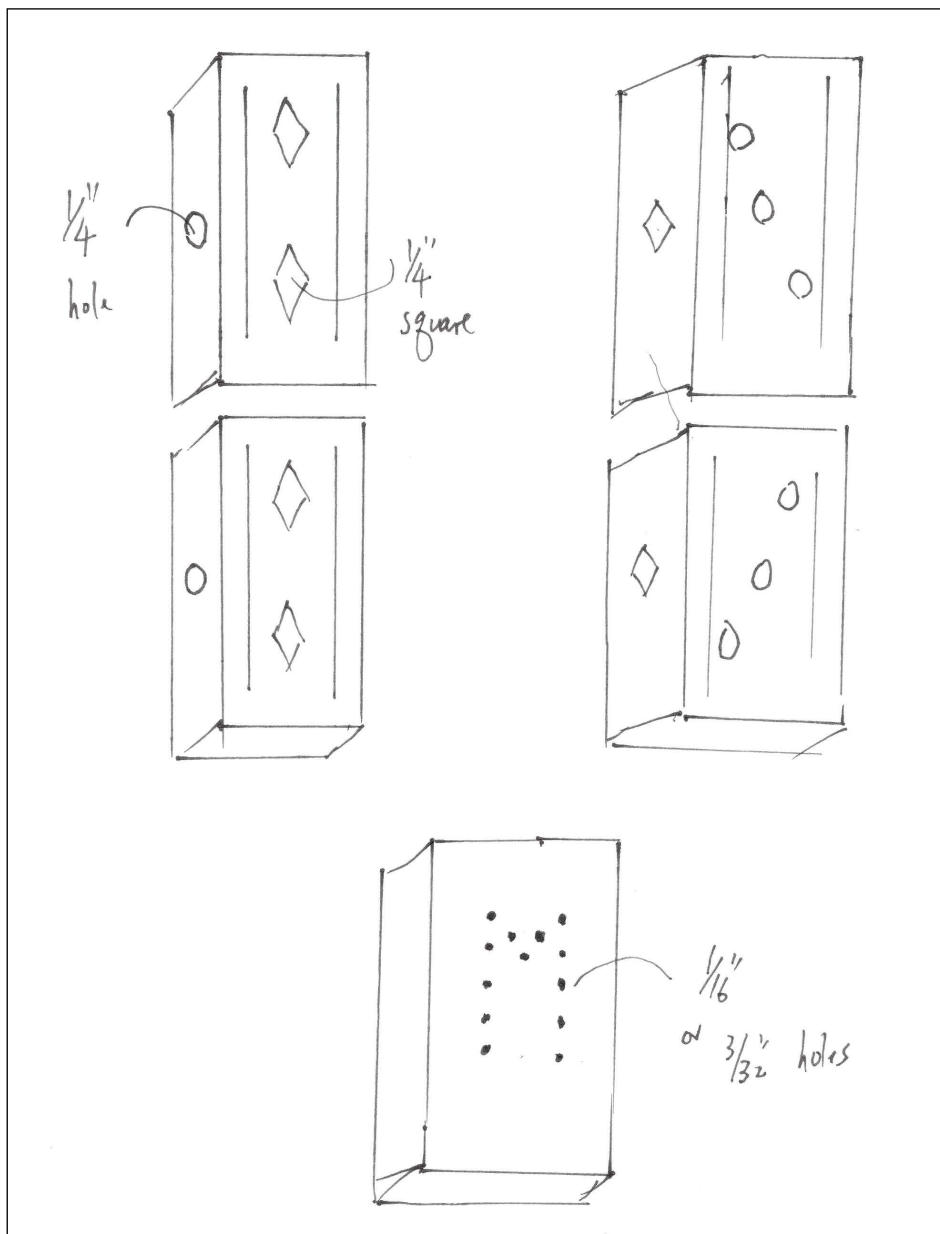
Sketch out your inlay designs to help visualize the patterns.
